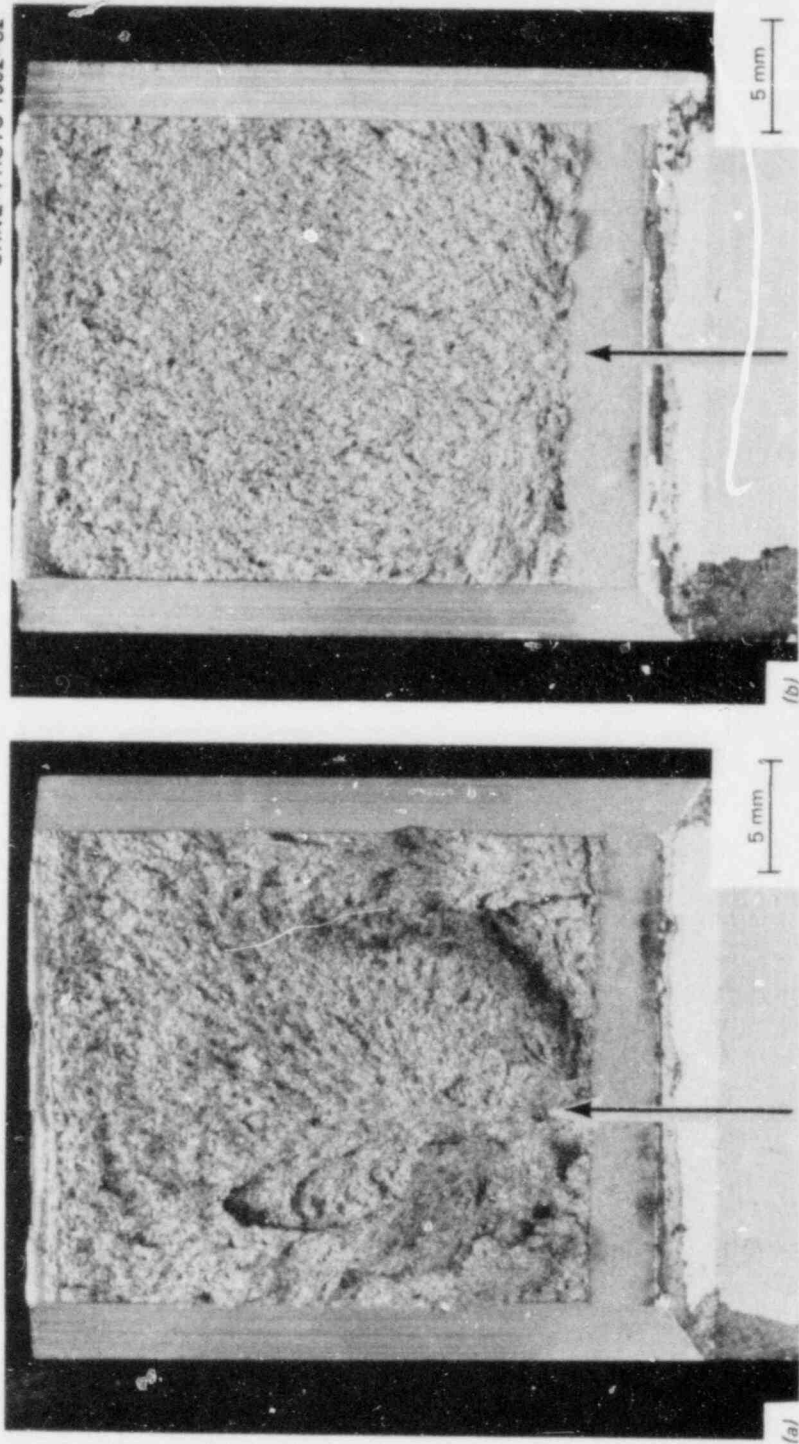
Fracture surfaces of the two specimens: (a) specimen 60R-90-2; (b) specimen 60R-86-1. Arrow indicates general location of fracture origin.
